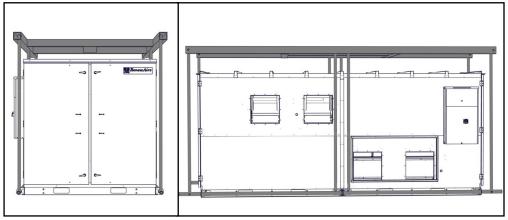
RIGGING ASSEMBLY GRAPHIC 2
